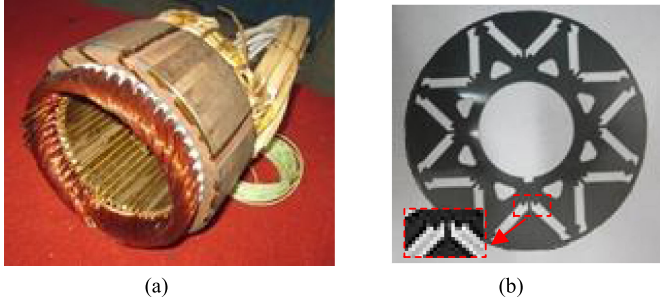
Configuration of the motor. (a) Stator core with windings. (b) Rotor core.
